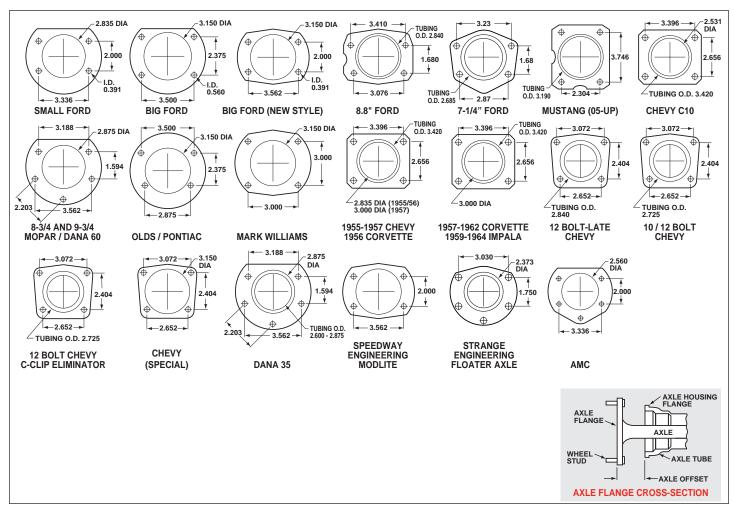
Rear Housing Flange Chart and Axle Flange / Offset Cross-Section
